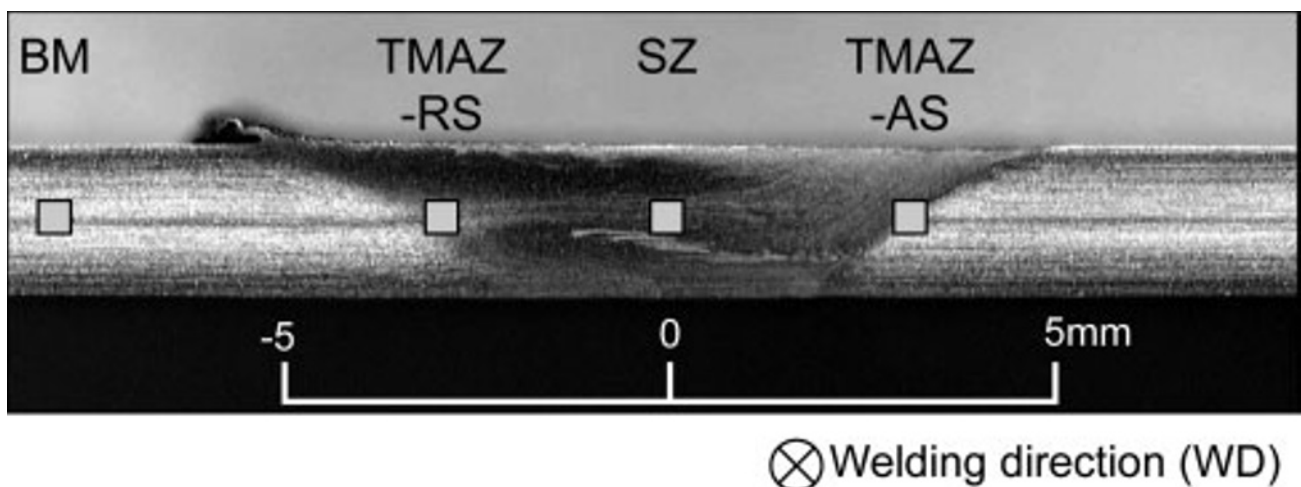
Macroscopic cross sectional view of the 2 mm-thick FS weld
